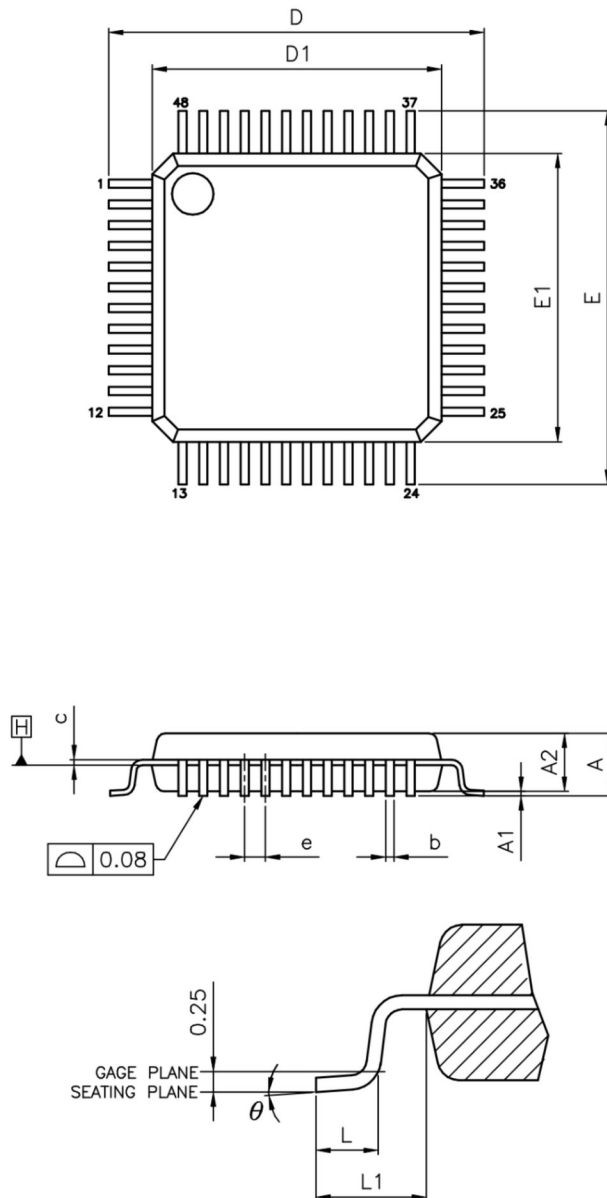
LQFP48 7 mm × 7 mm package mechanical drawing (top, side and lead detail)
